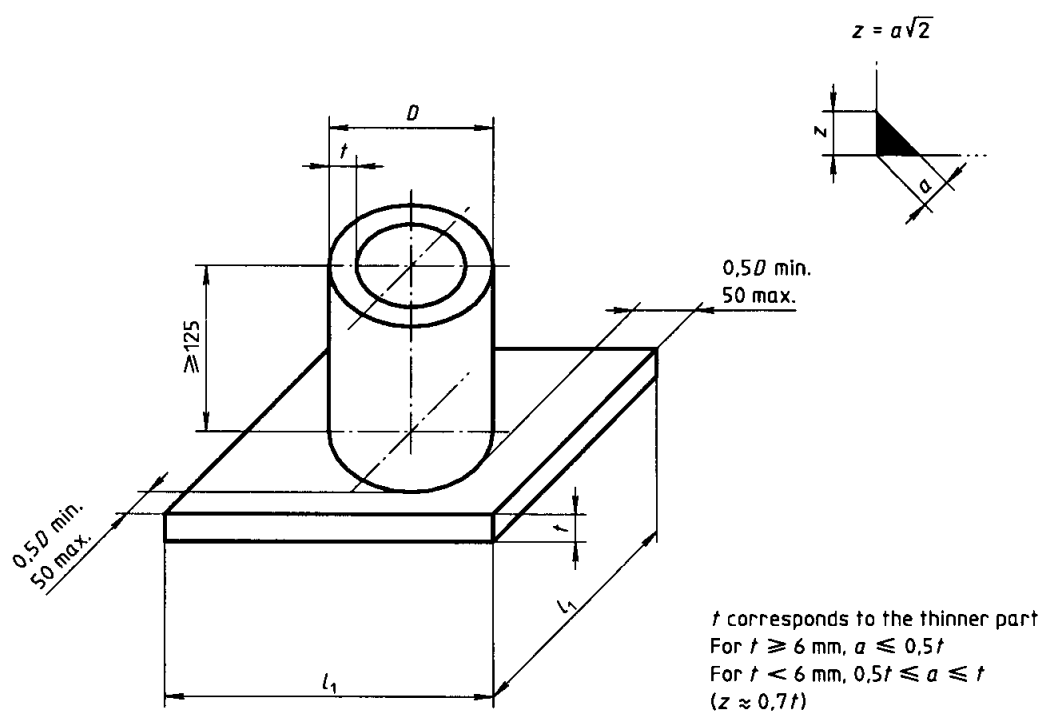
Dimensions of test piece for fillet weld(s) on plate
